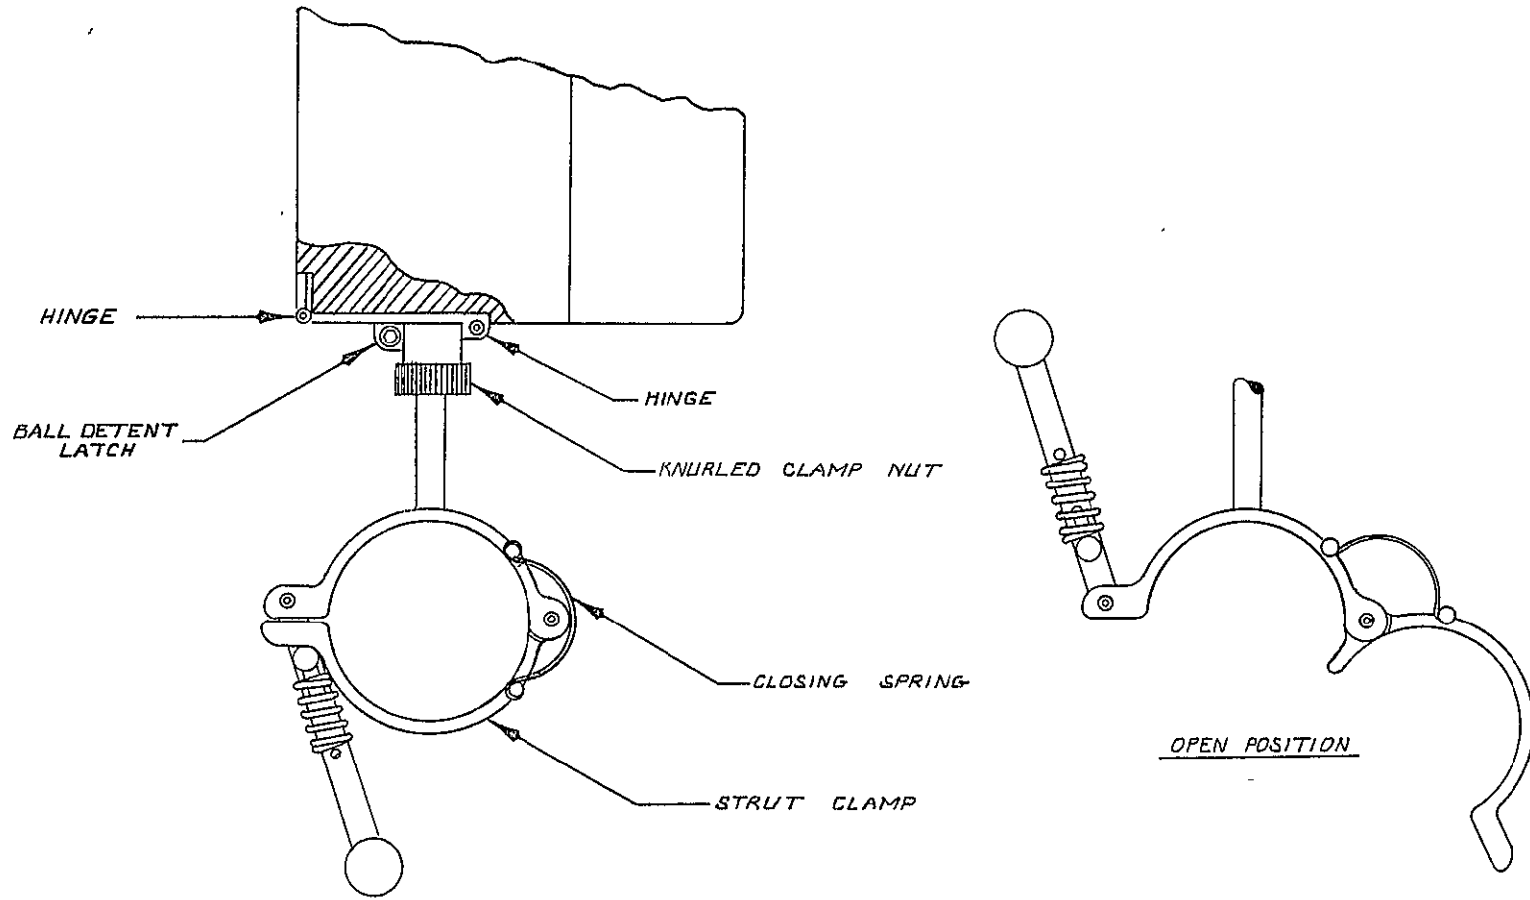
MEED Modified Strut Clamp Assembly
